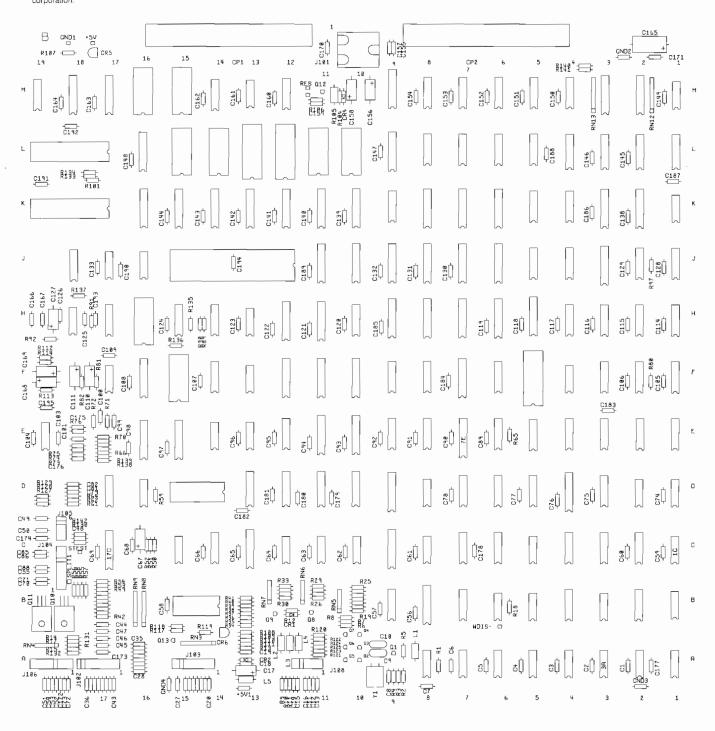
Main Printed-Circuit Board Assembly A042854-21 A
